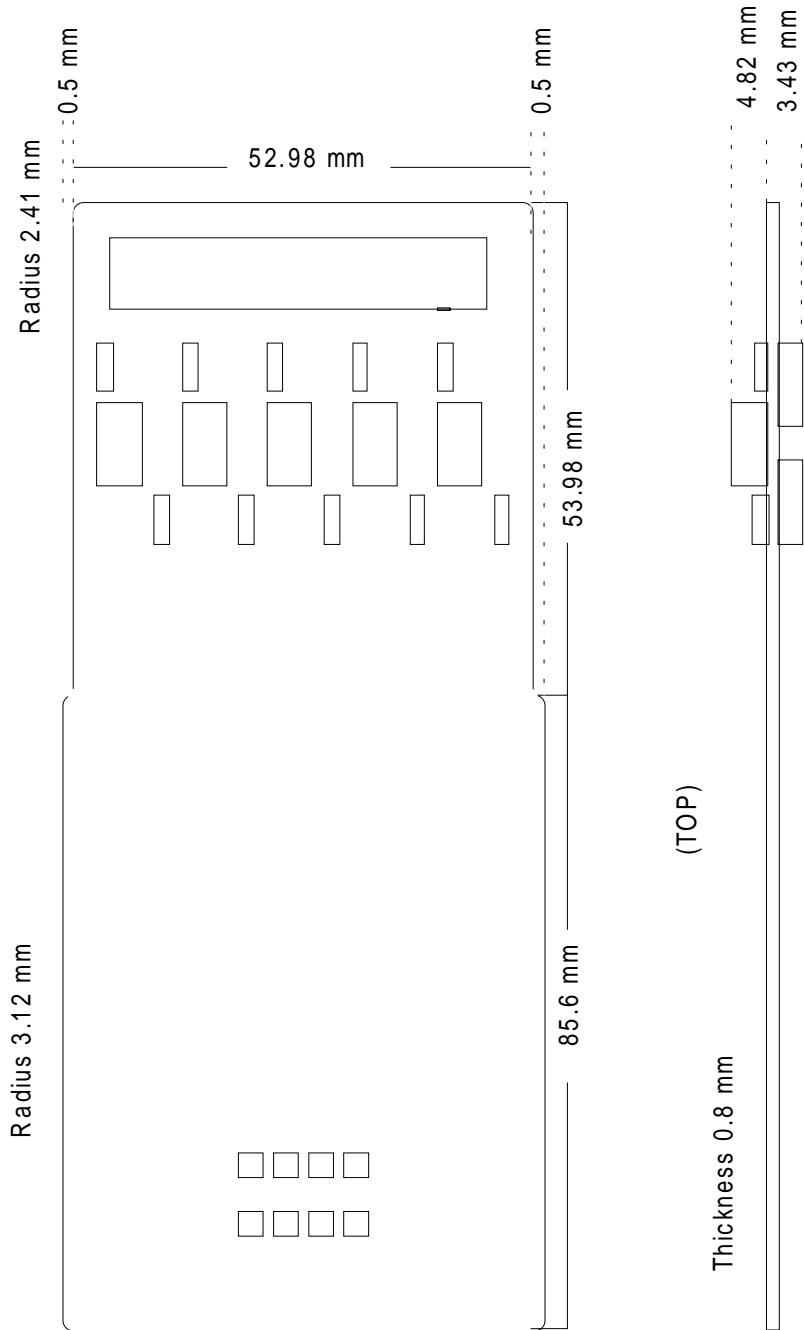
/ GSM 11.10: Dimensions of full size paddle
